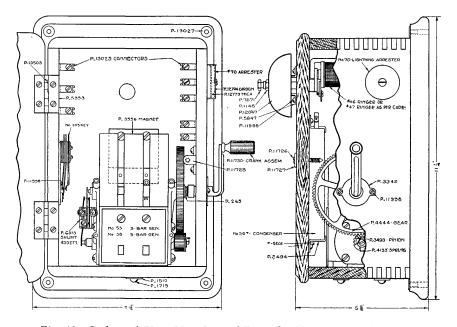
Code and Piece Numbers of Parts for No. 327 Desk Set Box
